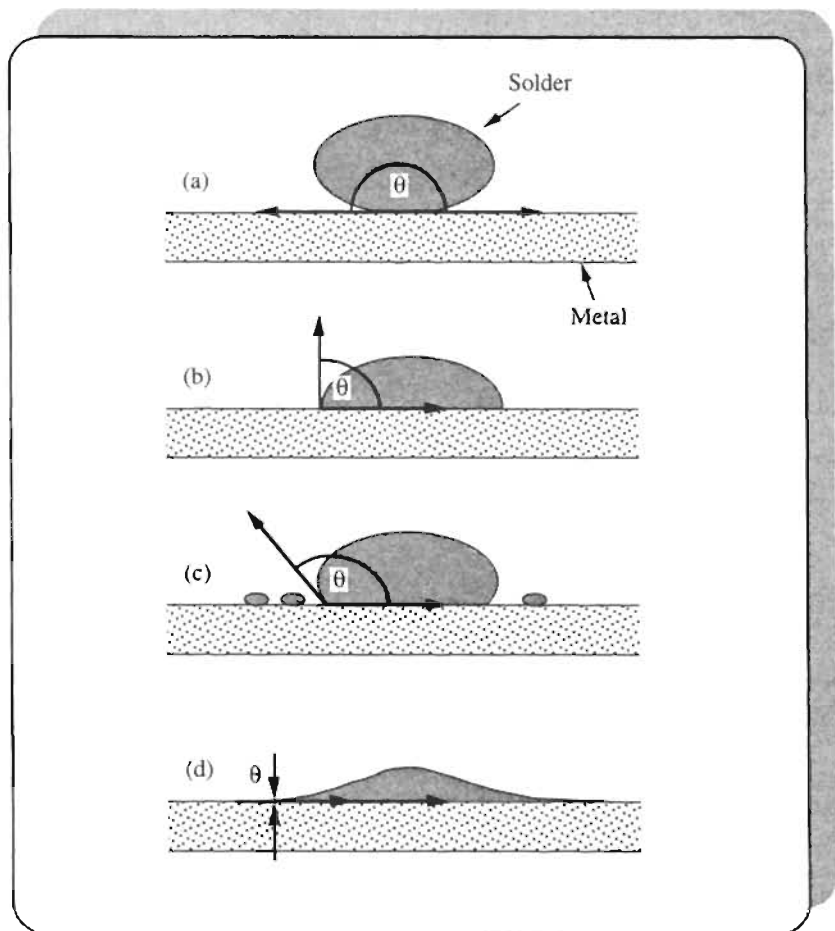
Four extremes of soldered joints (a) non-wetting (b) partial wetting (c) de-wetting (d) total wetting
